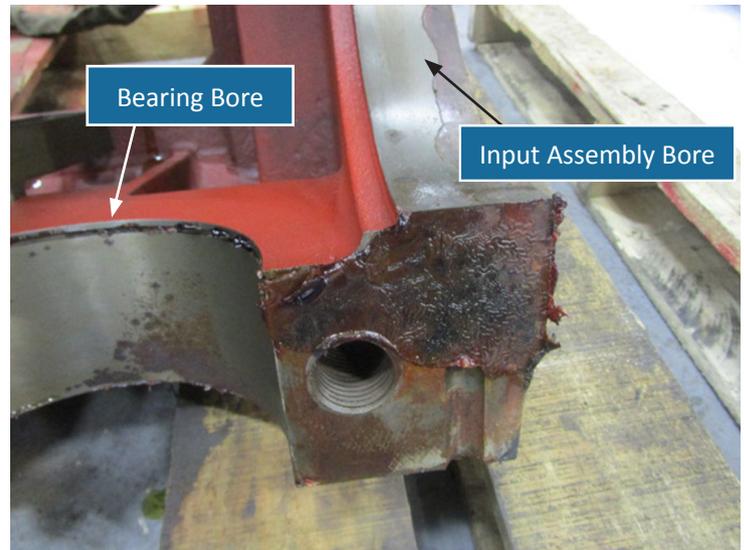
Housing fasteners improperly torqued, indicated by a .026" thick flange sealant that caused the bearing bore and input assembly to be out of tolerance
